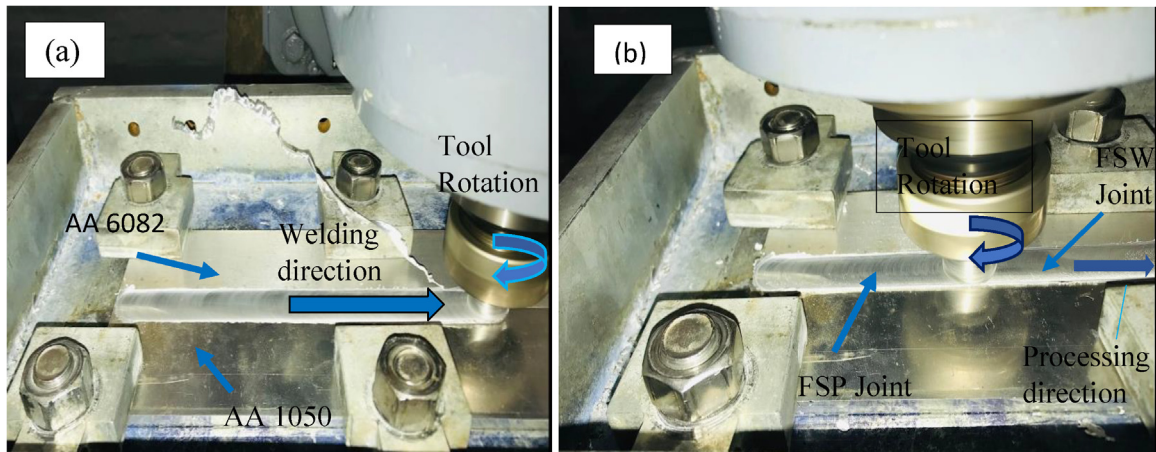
(a) Friction stir welding with AA1050 on the advancing side, and (b) Friction stir processing.
